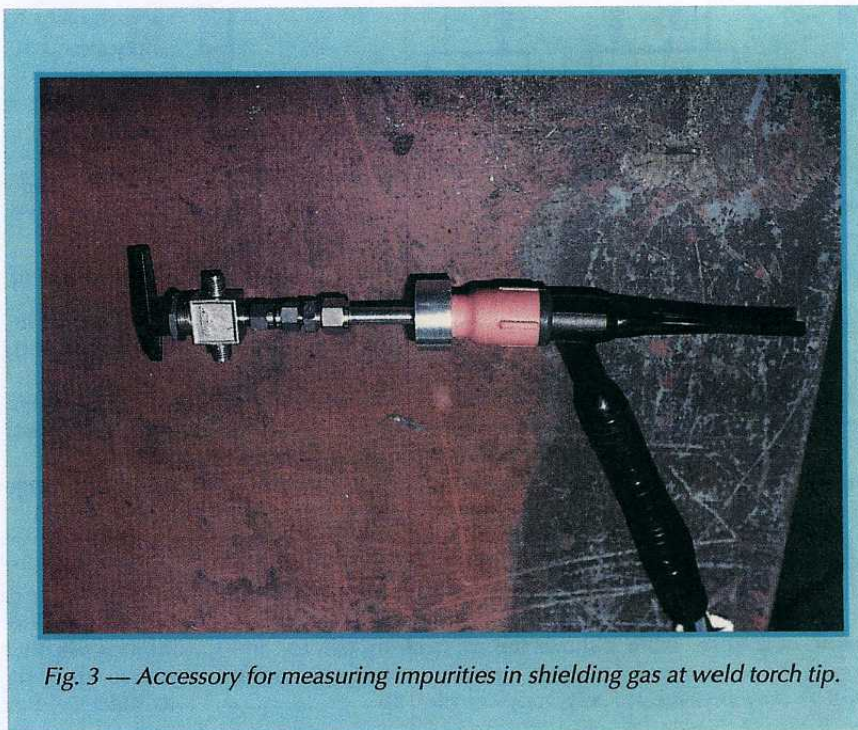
Accessory for measuring impurities in shielding gas at weld torch tip.
